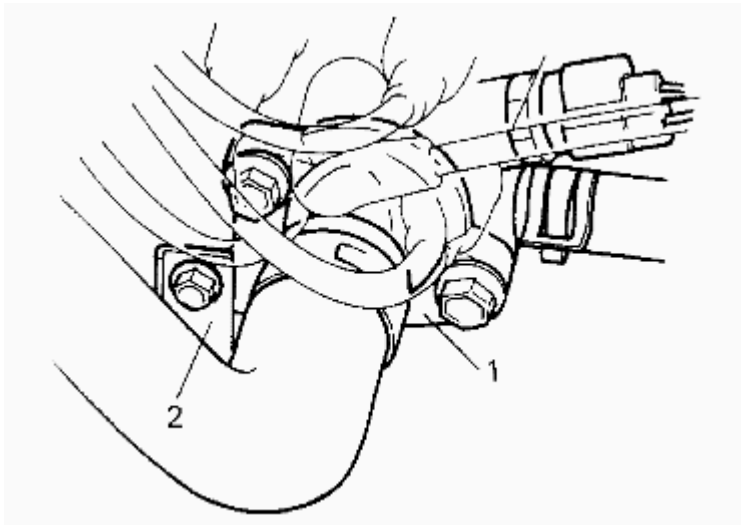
Thermostat Cap & Outlet Pipe Bracket
